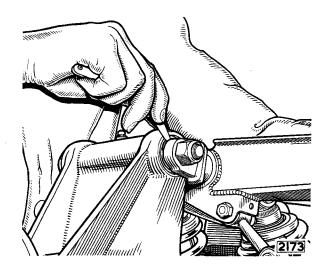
Using feeler gauges to measure the clearance between the hub carrier oil seal tracks and wishbone forks
